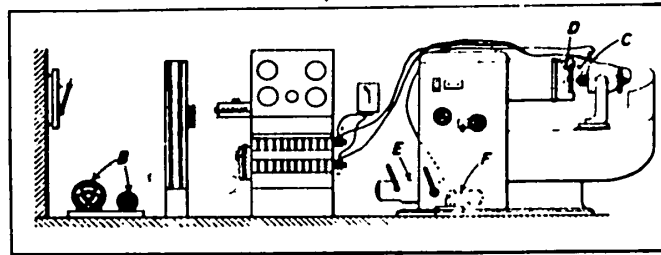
General Setup of Experimental Apparatus for "Grinding" of Tools by the Electric Spark Method. B is motor-alternator to supply the unit with direct current. C denotes the tool that is to be "ground" and D the "grinding wheel". This is driven by an AC motor E, while the pump F circulates the "coolant". (According to V.A.Krivoukhova)
